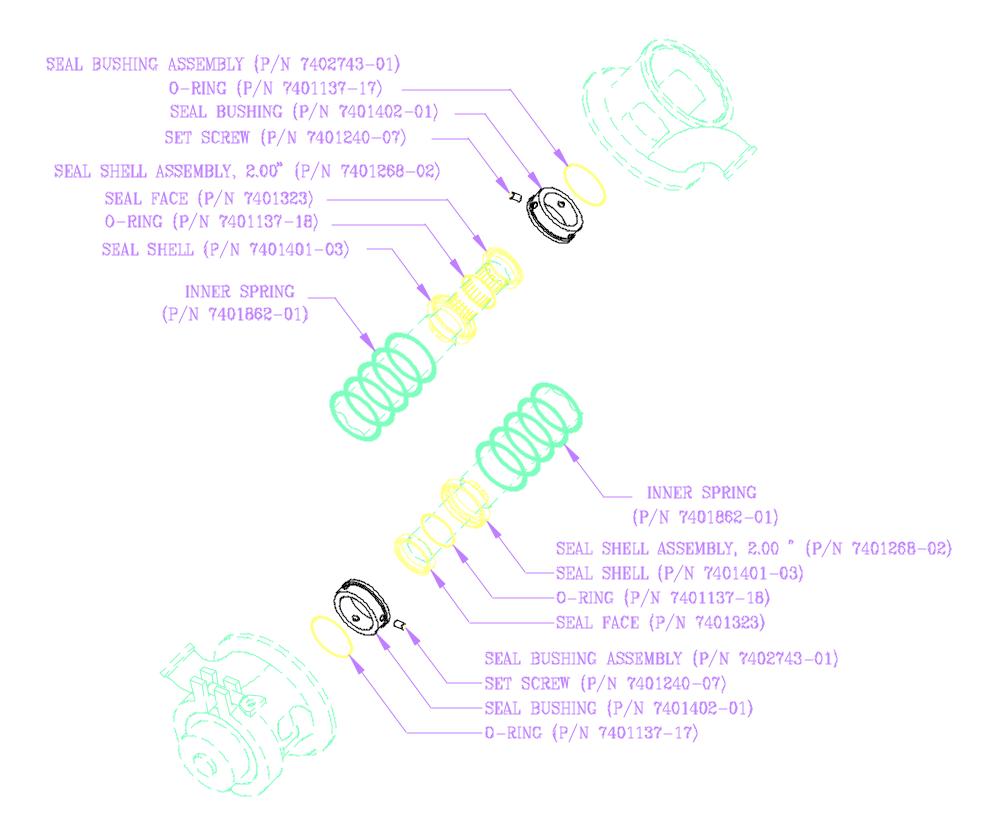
Standard And Hard Face Seal Assemblies, Cast Heads Backside of Figure 7-1 -- 11 x 17 foldout drawing
